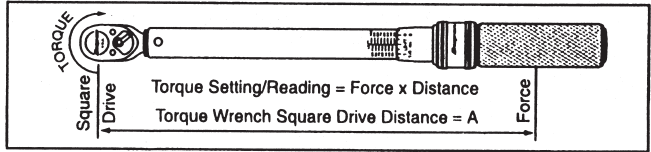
Fastener torque equals torque wrench square drive torque.
